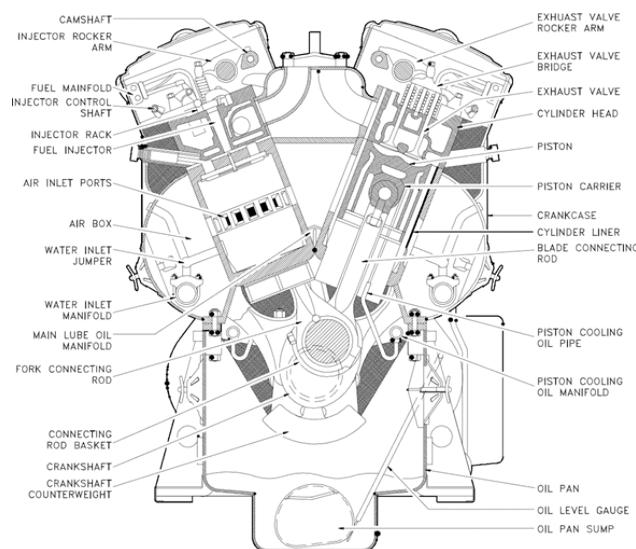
3 Cross Section of a V-type Four Stroke Diesel Engine
